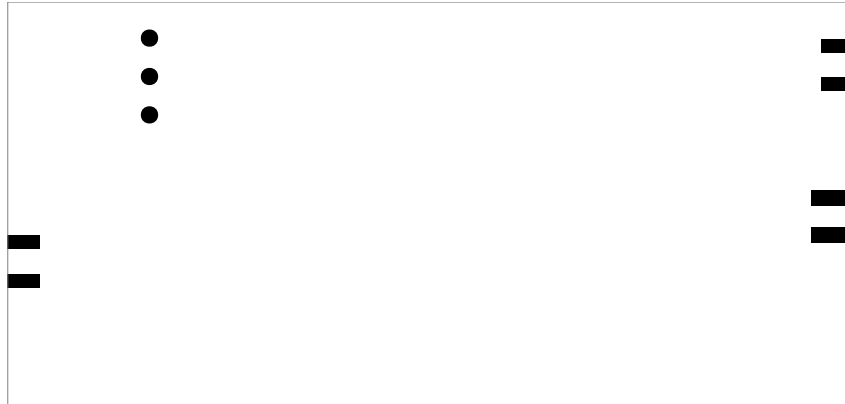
Bottom solder mask layer for pulse generator revision 1.
